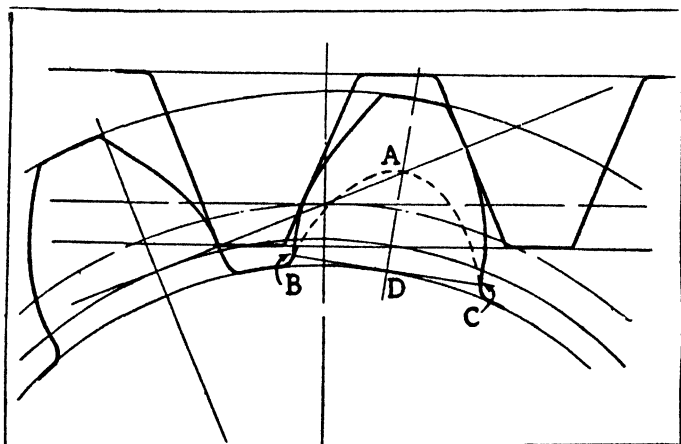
TEN-TOOTH SPIRAL BEVEL PINION MESHING WITH 47-TOOTH GEAR
